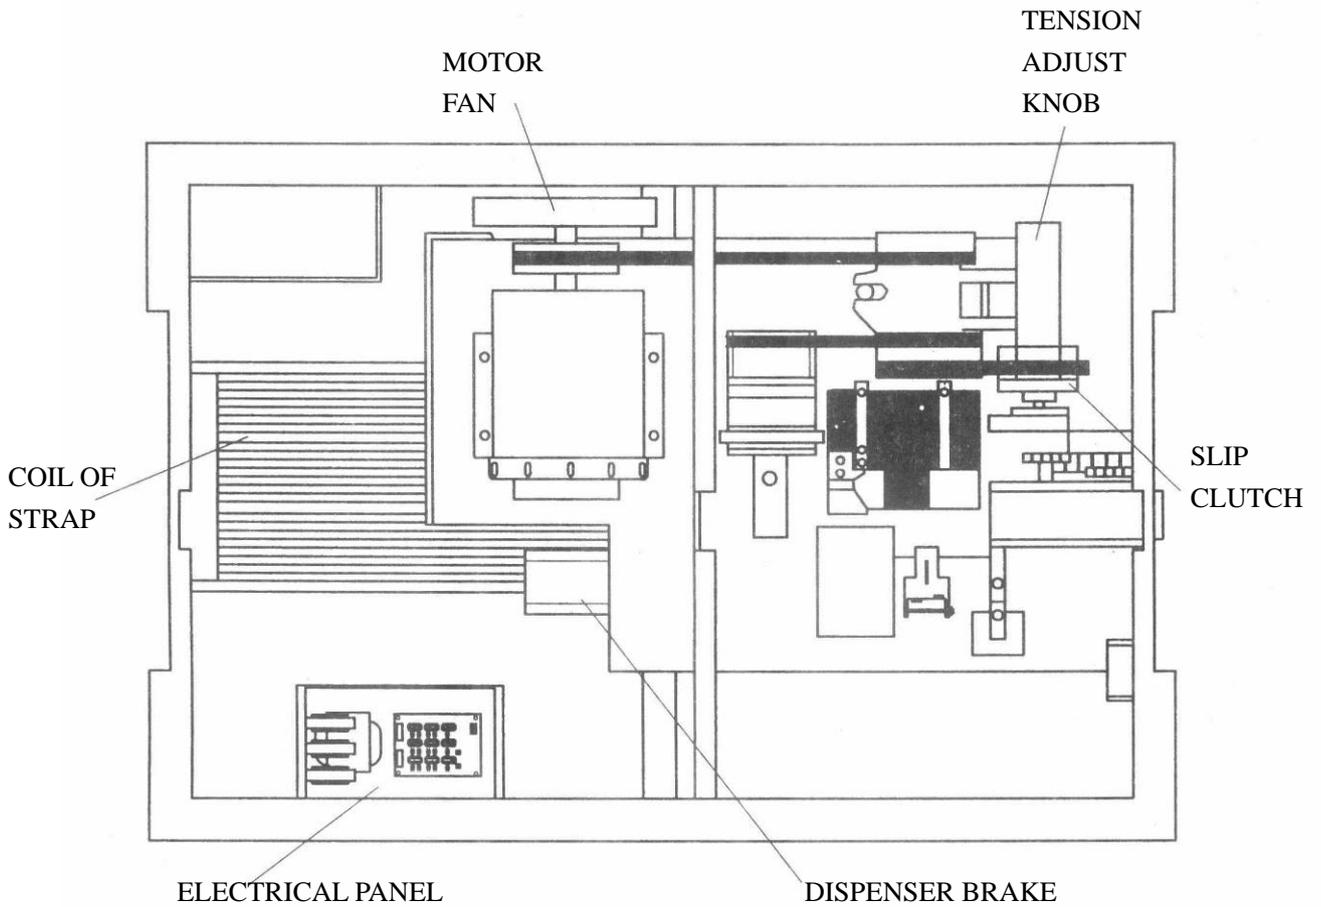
MAJOR COMPONENTS, TOP VIEW
